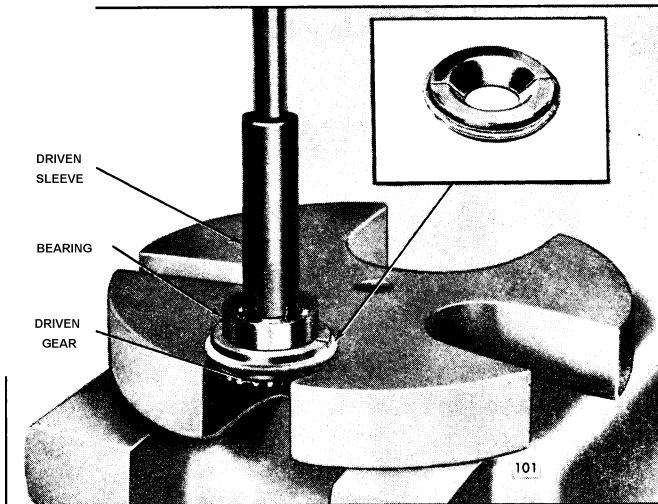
Removing Sleeve and Bearing from Driven Gear with Tool J 4685
